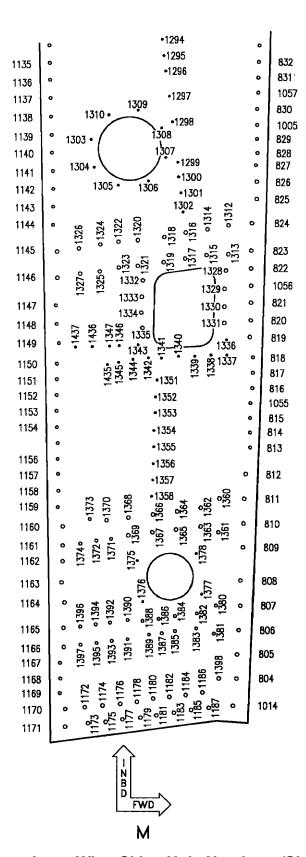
Inner Wing Skins Hole Numbers (Sheet 8)
